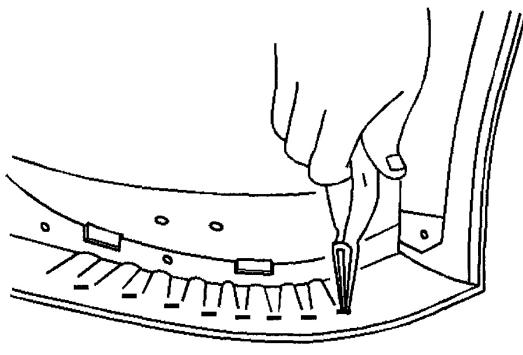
Identifying #5 Bow Glare Cover Rivets Courtesy of GENERAL MOTORS CORP.
